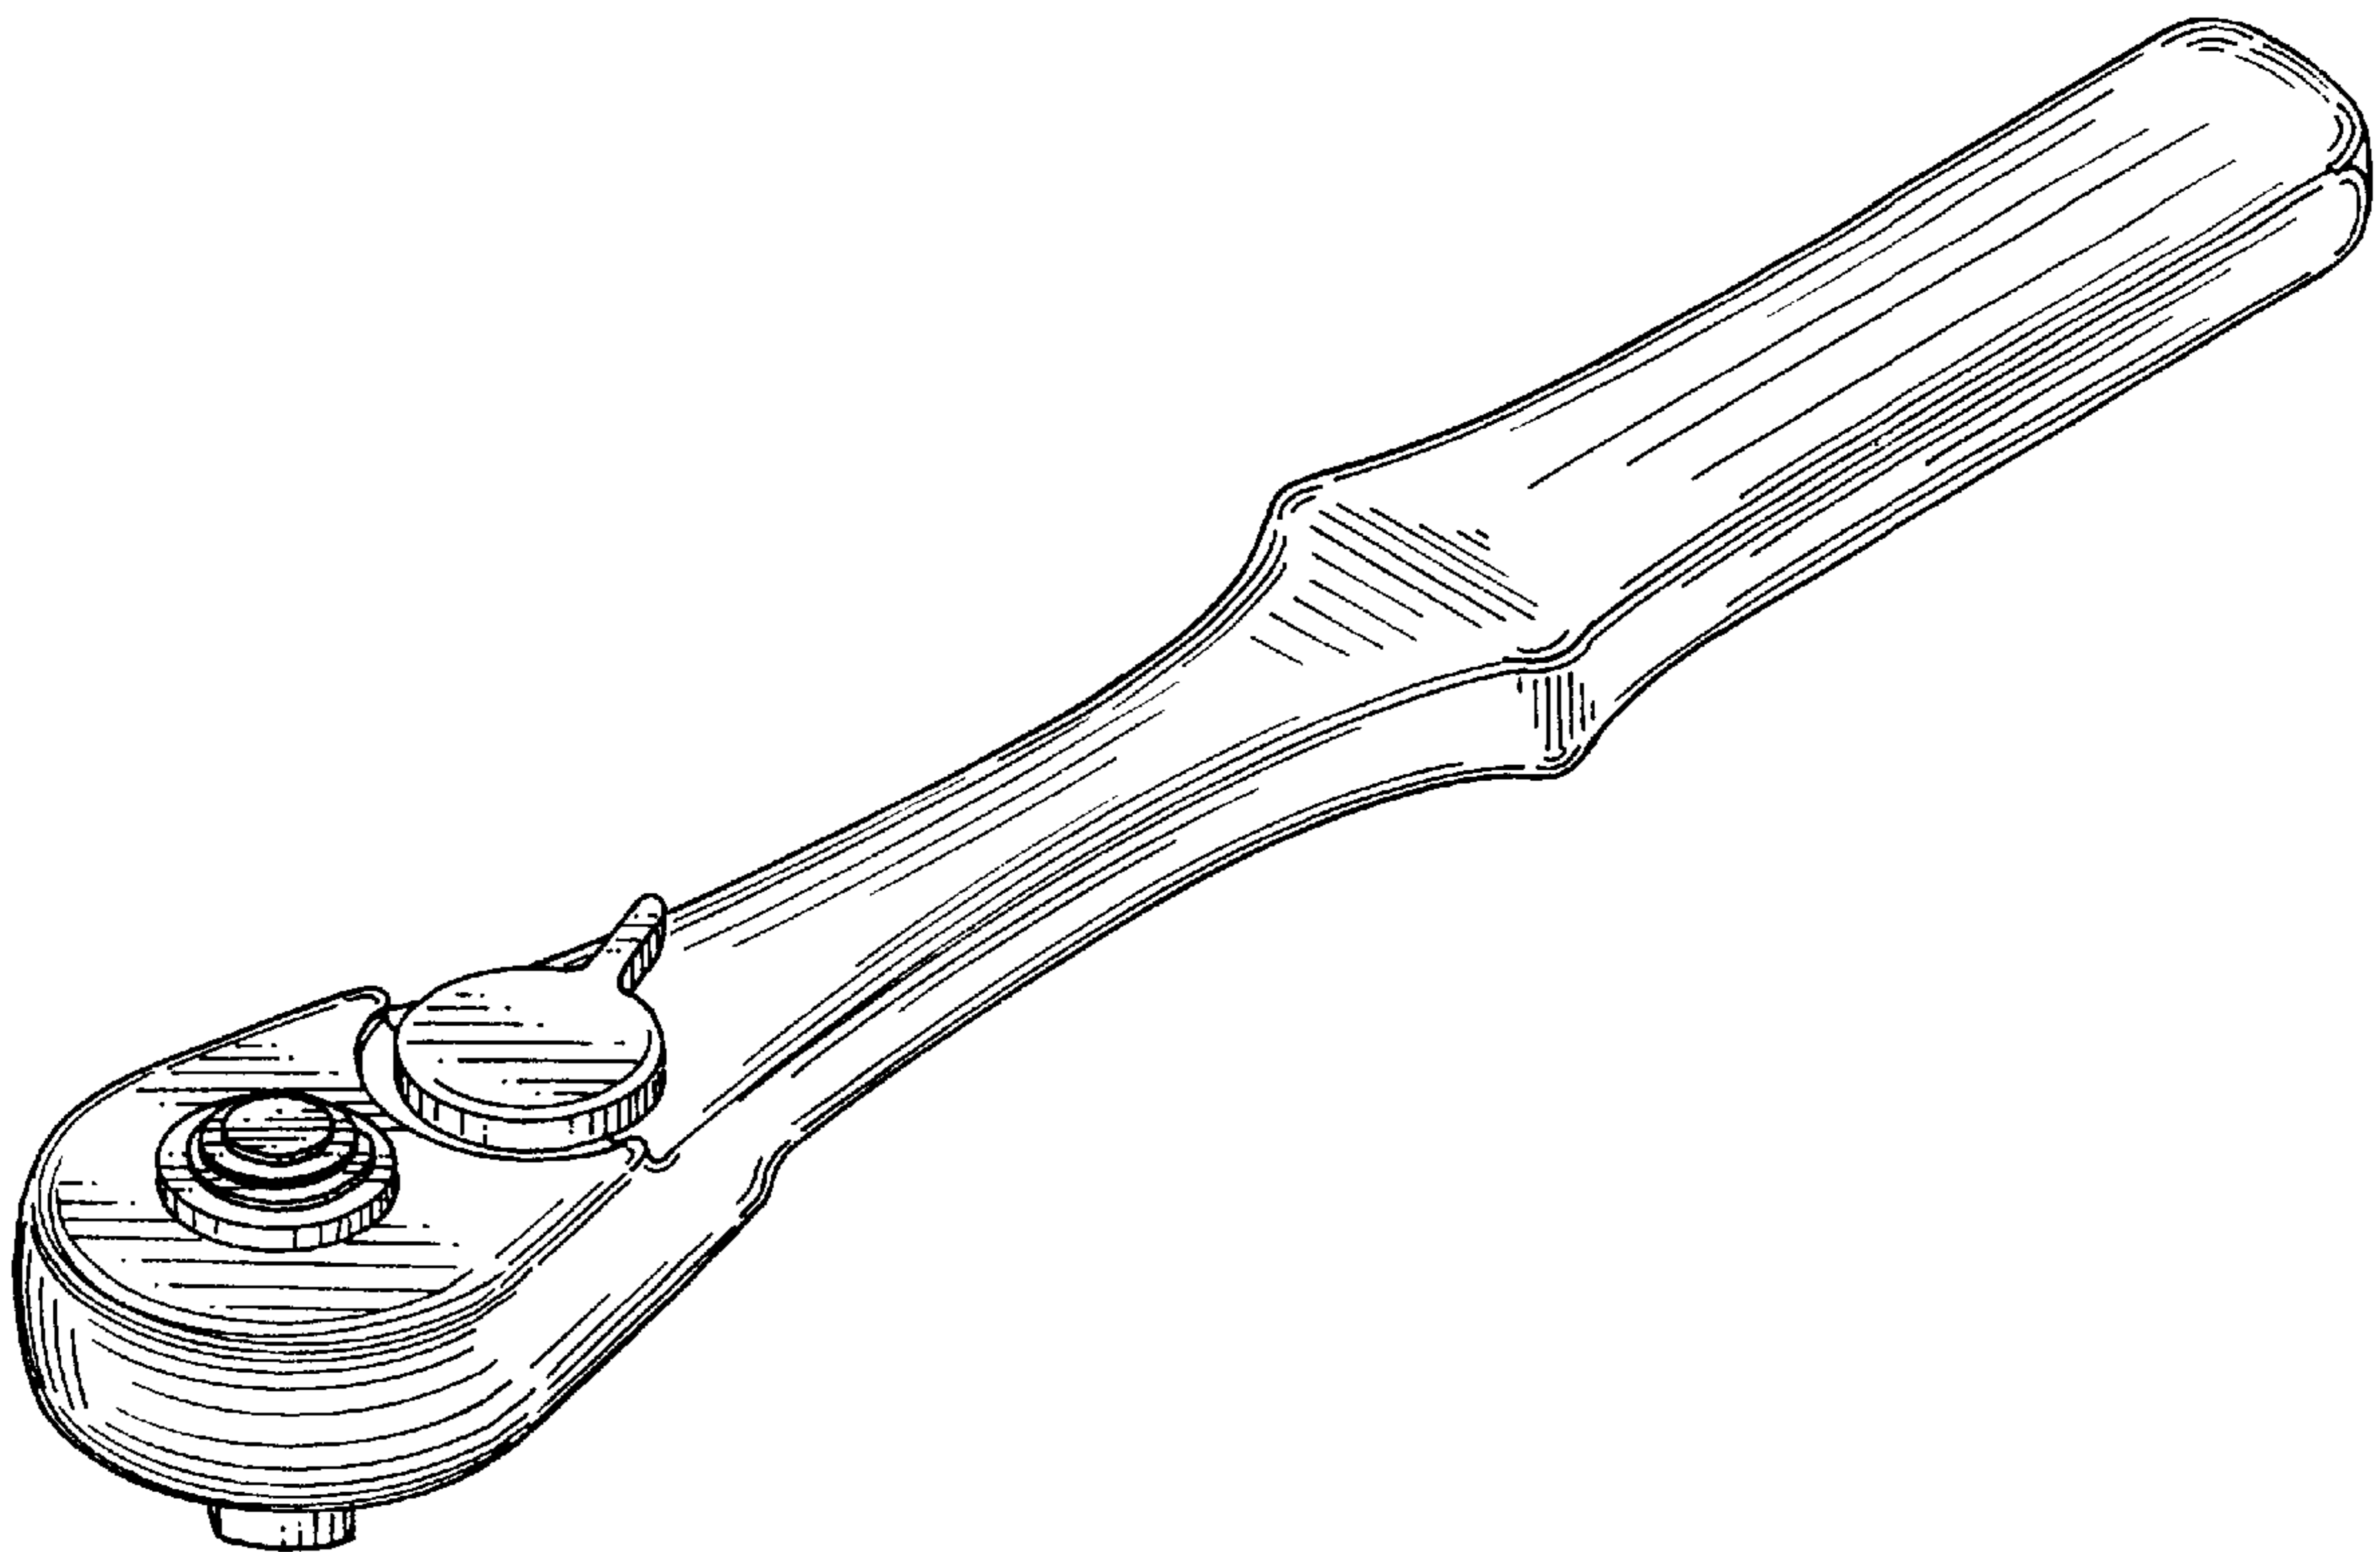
is a front top perspective view of a socket wrench showing my new design;
